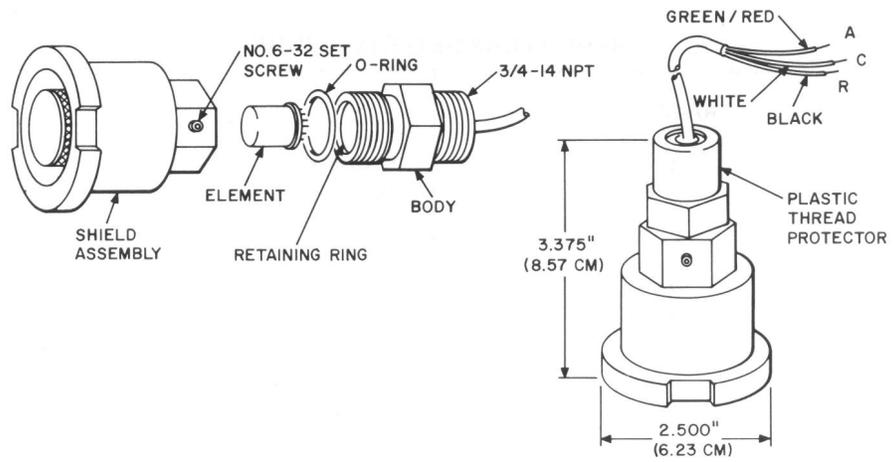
Bacharach Combustible Gas Detector (Model 800-080.10) Exploded View
